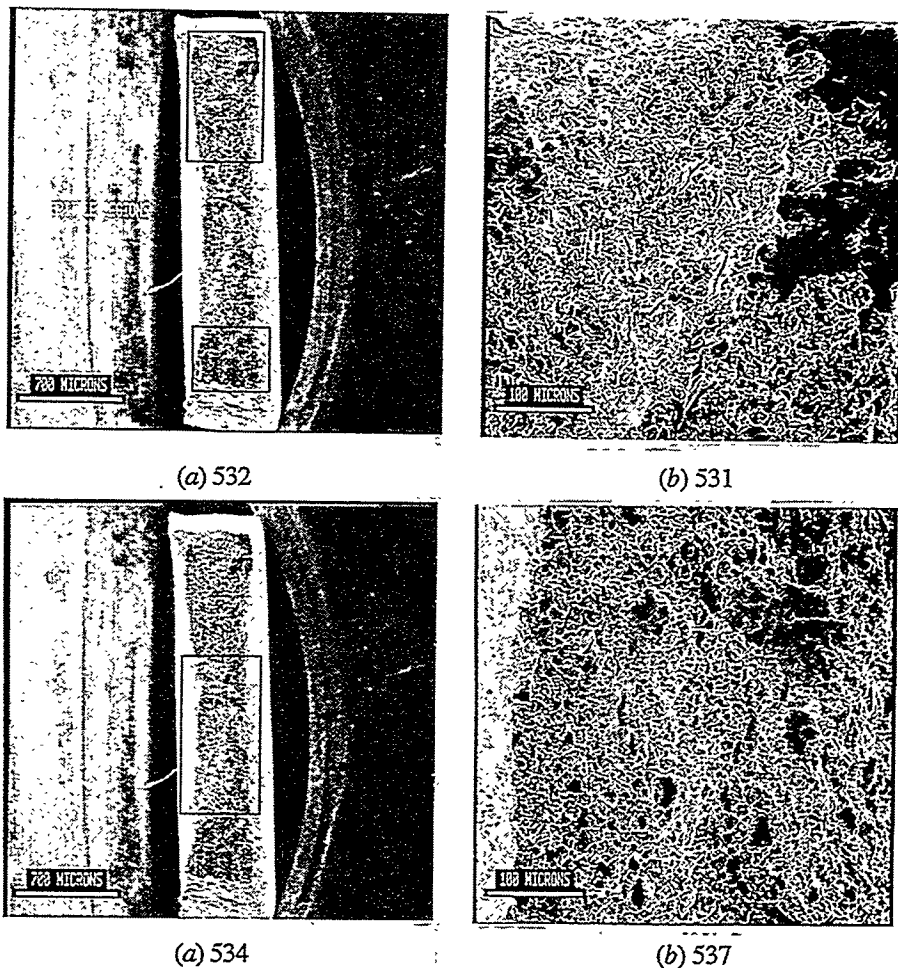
Fracture surface of FAPY heat specimen 899-21690 in cold-worked condition tested at room temperature: (a) and (b) end location, and (c) and (d) midsection location.
